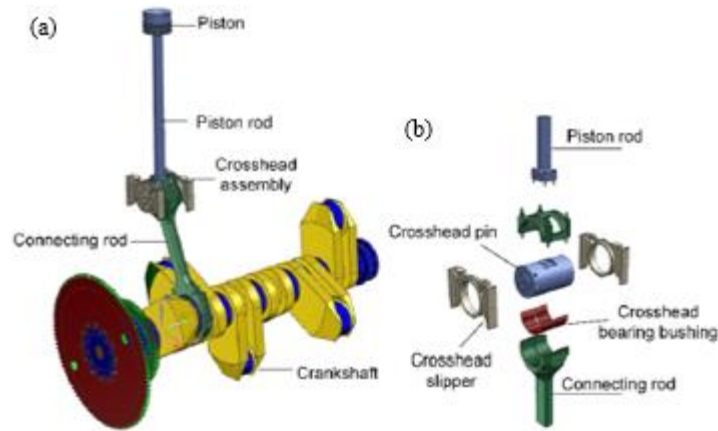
(a)Main running gear in a two-stroke marine diesel engine and (b) an exploded view of the crosshead assembly [4]
